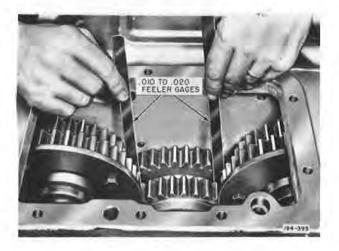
Checking Main Driving Pinion Hi-range Gear End-play
